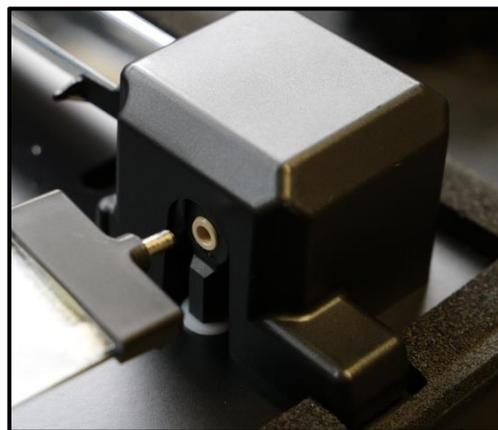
INCLINE THE STEPPER MOTOR SUPPORT
